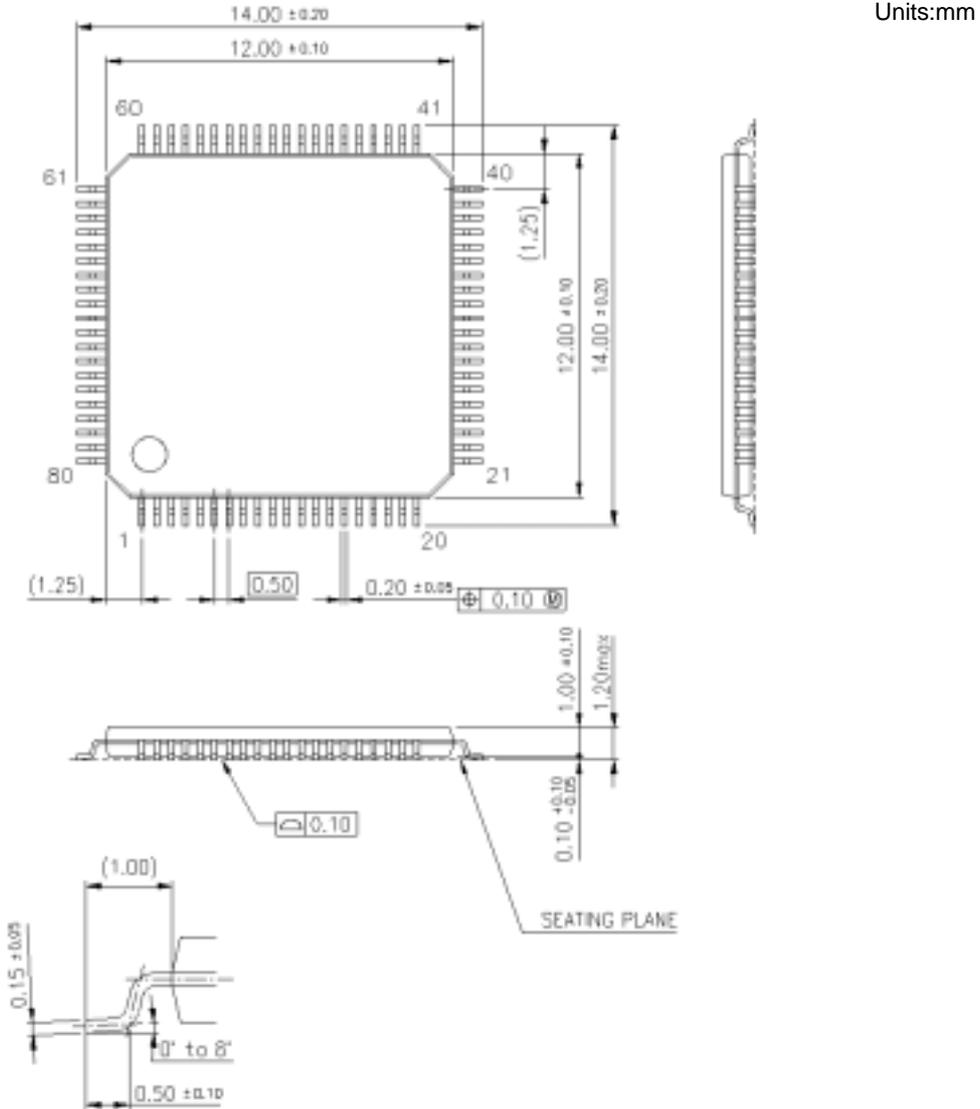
Package Dimension of TQFP080-P-1212F
